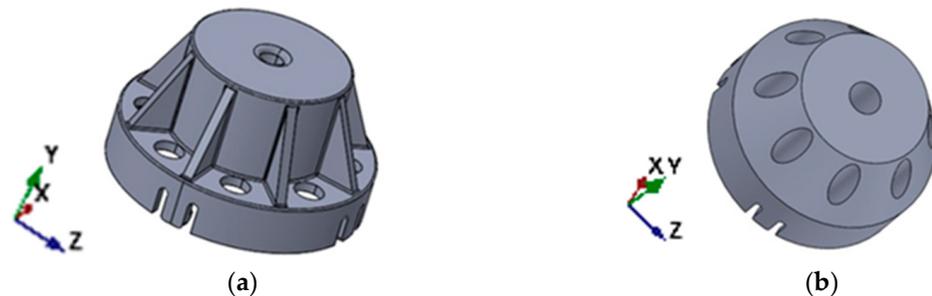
(a) Initial CAD of the manometer body; (b) final CAD of the manometer body.
